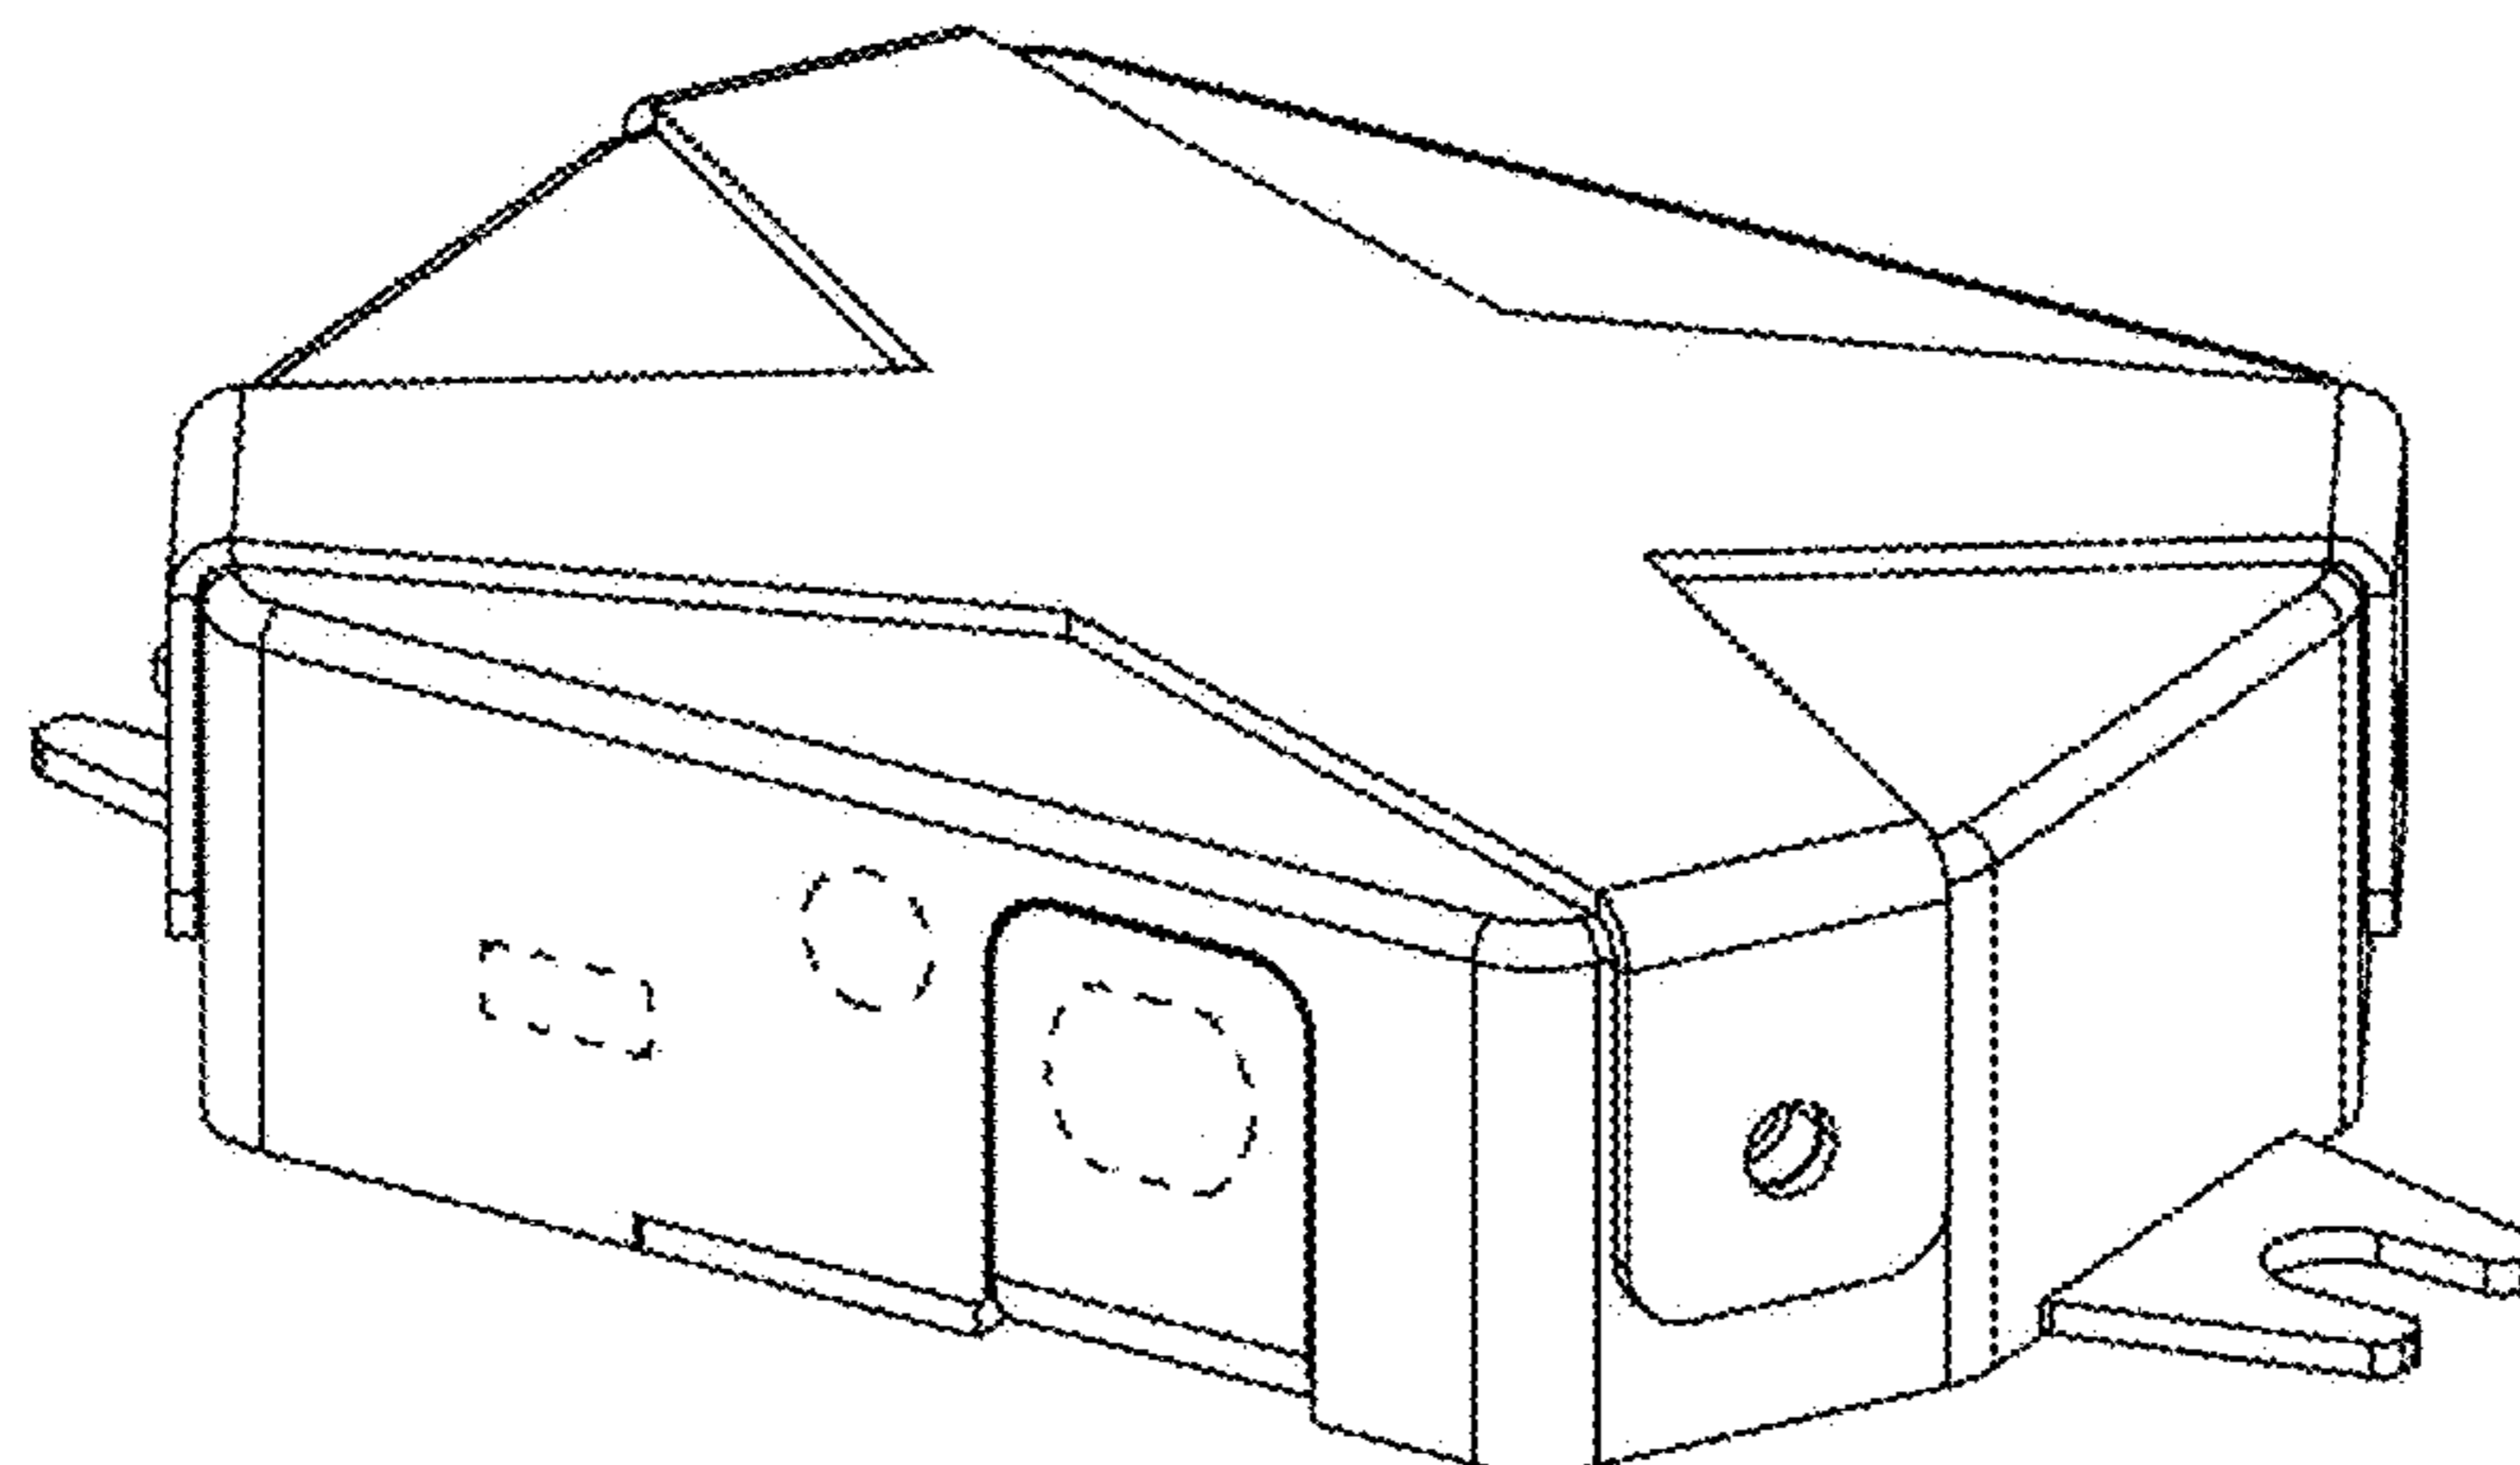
is a rear view of the housing for an automotive electrical switch management apparatus of FIG. 1;
